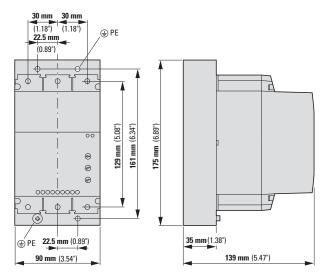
Dimension drawing DS7 without SWD – Size 3 (41 – 100 A)
